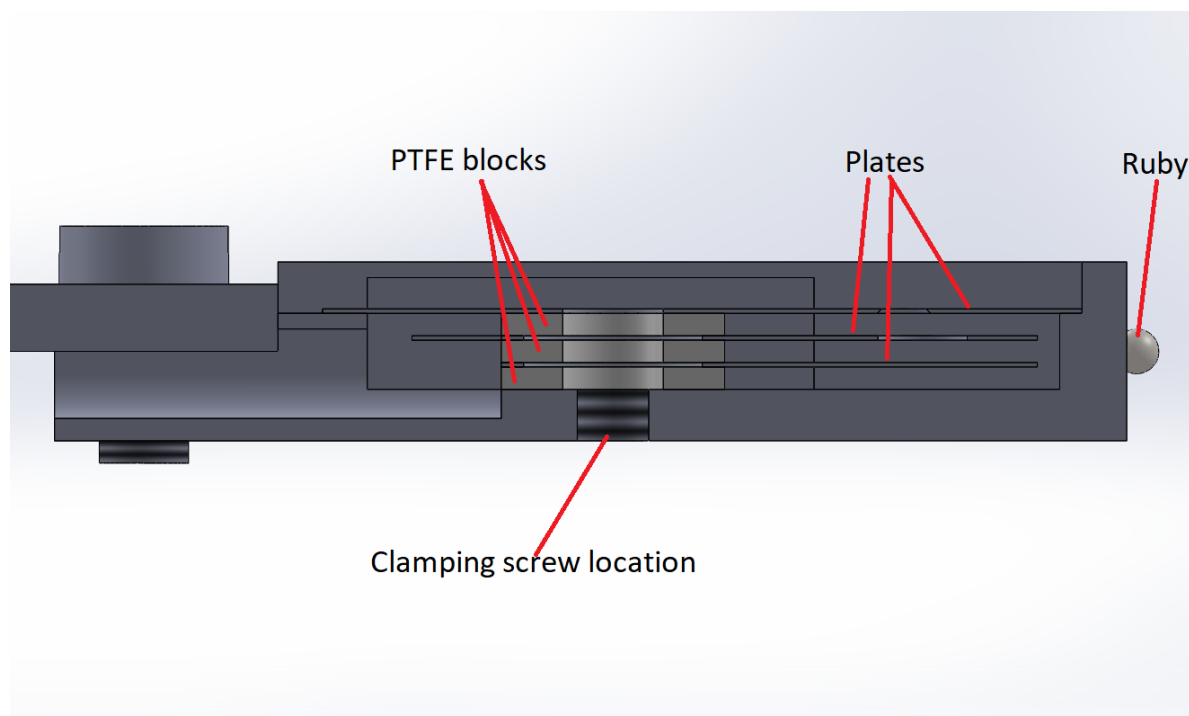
Insertable Dosimetry Cross-section Highlighting the Key Components
